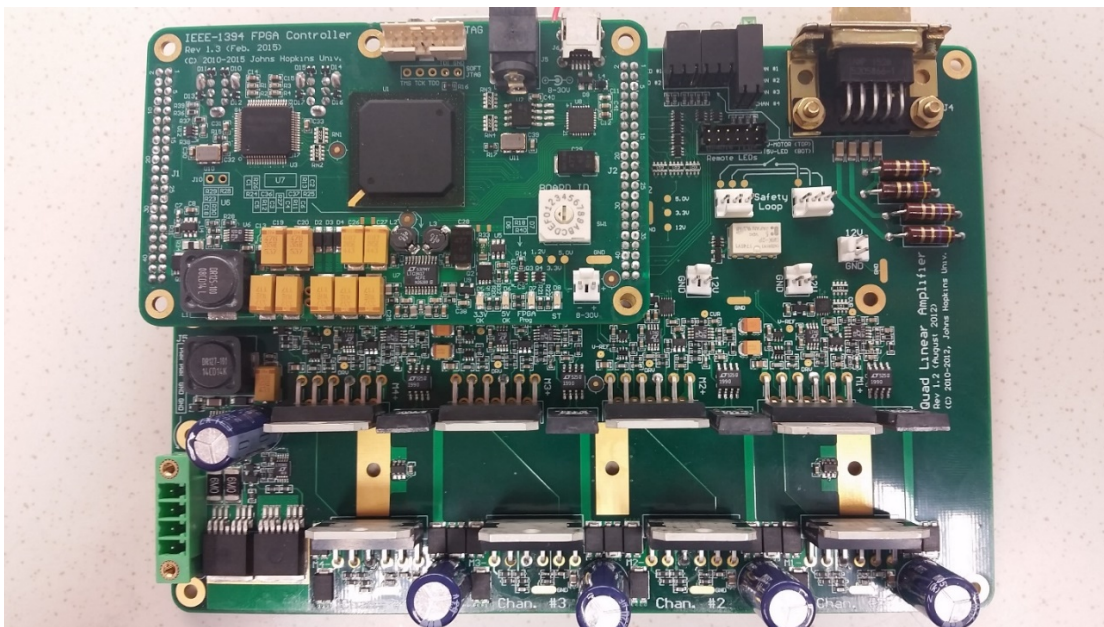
A completed FPGA1394-QLA controller board. The FPGA1394 board is mounted by two 44-pin connectors on the top-left section of the QLA board.
